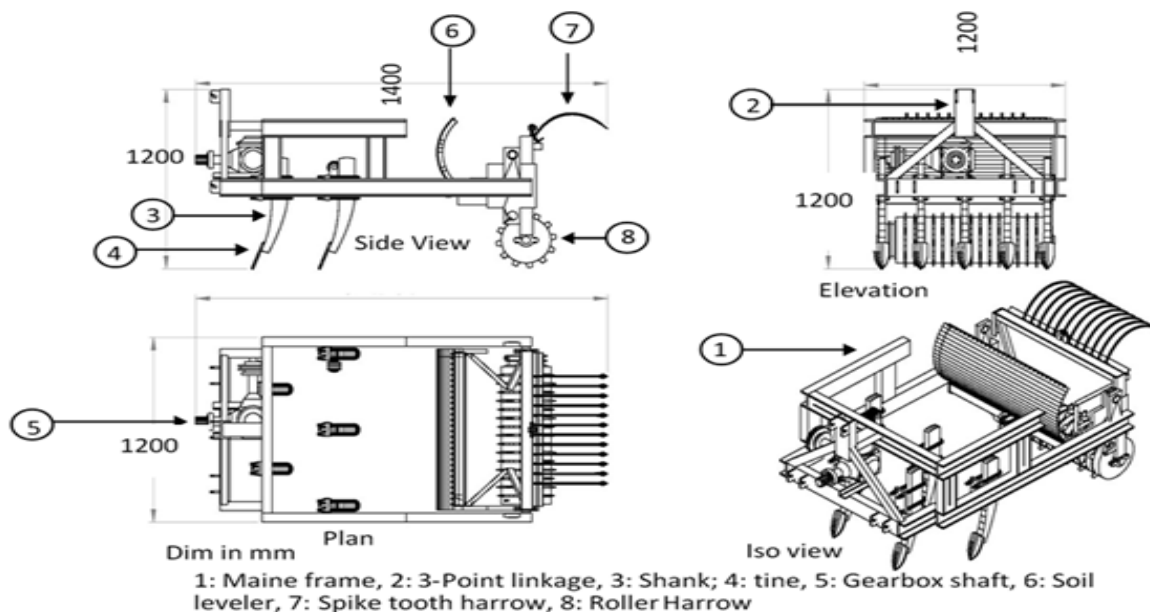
Engineering drawing, component and overall dimensions of MSP machine.
